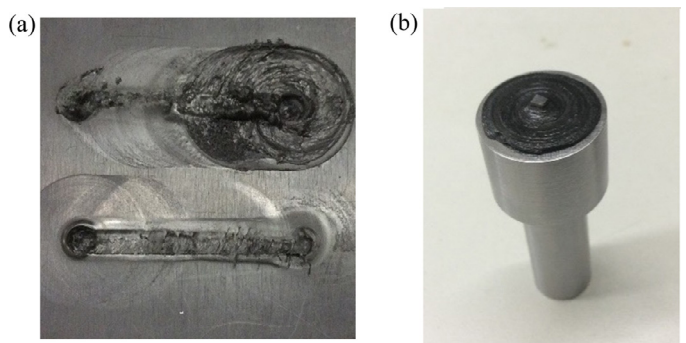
(a) Welded part with 3 mm squared probe and 20 mm rotating shoulder and (b) PP material stuck around the probe and shoulder surface.
